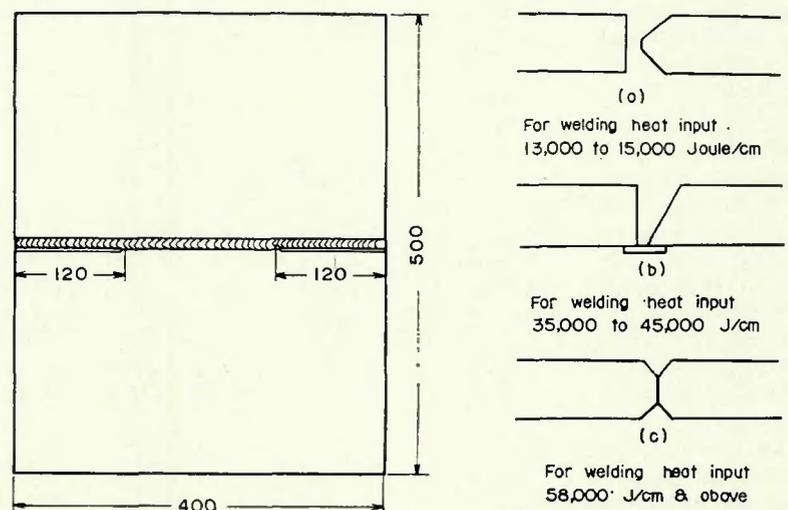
Deep notch test specimen with welded joint and edge preparation
